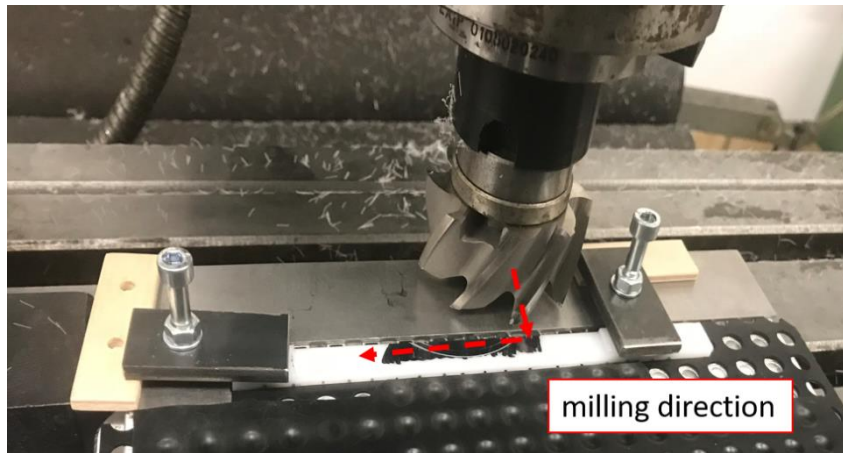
Additional clamping and changed milling conditions for the compression molded specimens.
